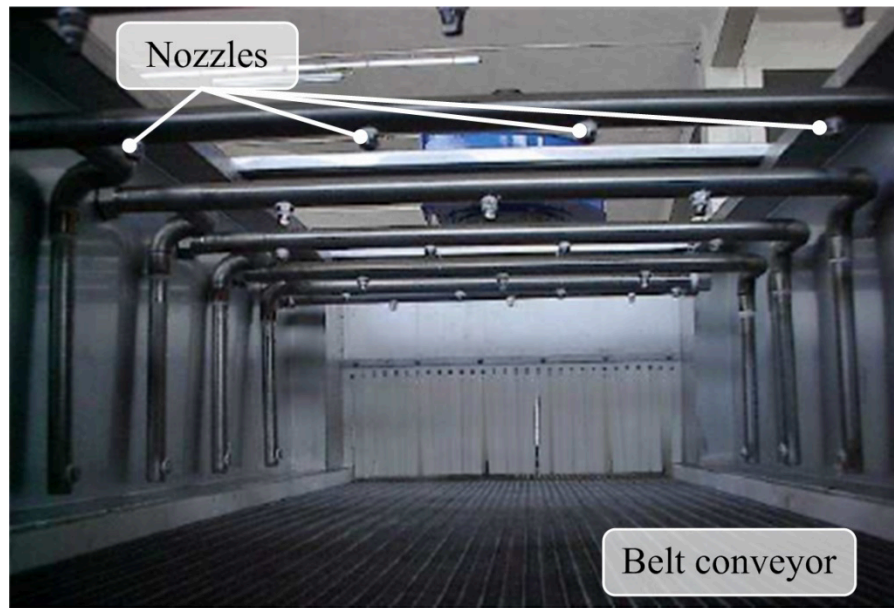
Tunnel washing machine (Courtesy of Brovedany SpA)
